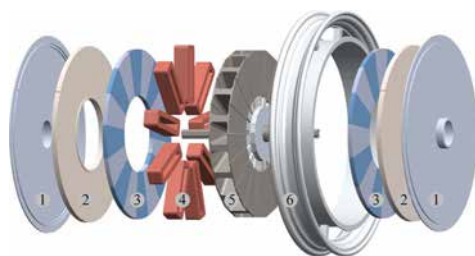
Exploded view of the SAT PMBLDC motor: 1, end cover; 2, rotor yoke; 3, magnets; 4, stator winding; 5, stator; and 6, wheel rim.
